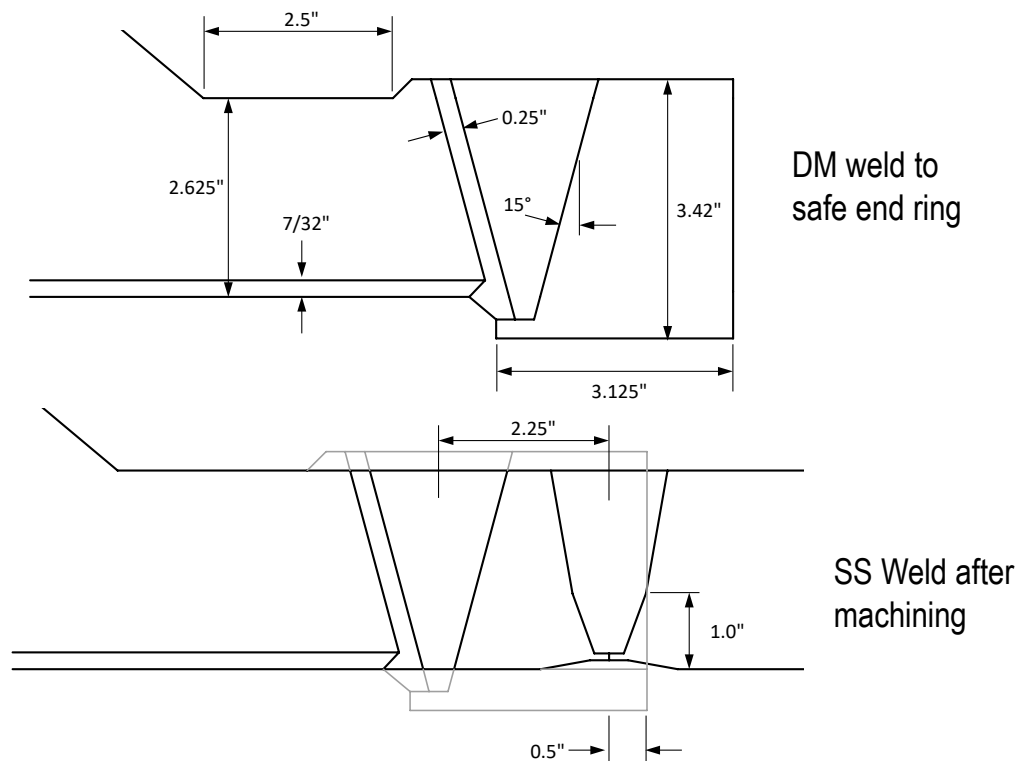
Reactor Pressure Vessel Outlet Nozzle Weld Geometry
